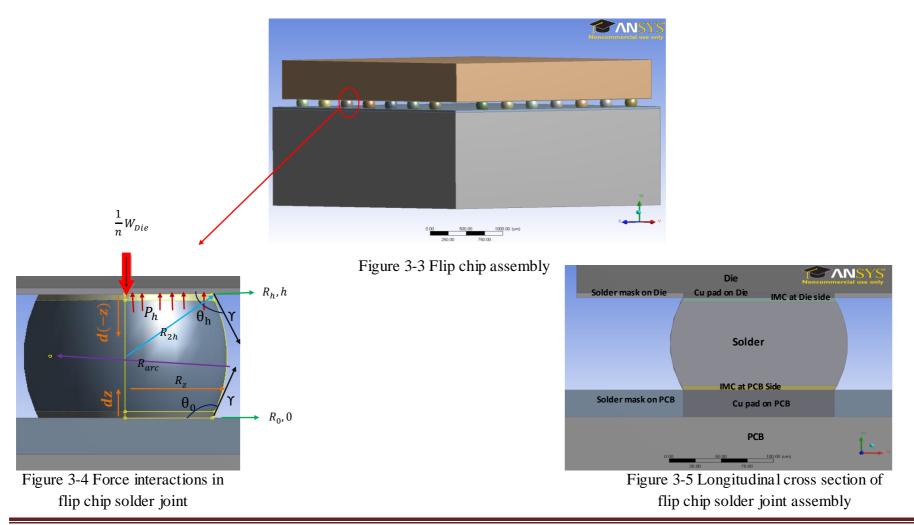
shows the FC architecture where fig. 3-2(a) illustrates the attachment of the ball grid array (BGA) to the die in a daisy chain layout, while fig. 3-2(b) presents the dimensions of the BGA matrix and fig. 3-2(c) is a representation of a singular ball mount. Table 3-2 depicts the FC parameters whose assembly is represented in fig. 3-3 and fig. 3-4 is the magnified structure of one of the joints showing force interactions when the FC is mounted on a PCB using reflow soldering process. Fig. 3-5 is a longitudinal cross-section of the joint assembly.
